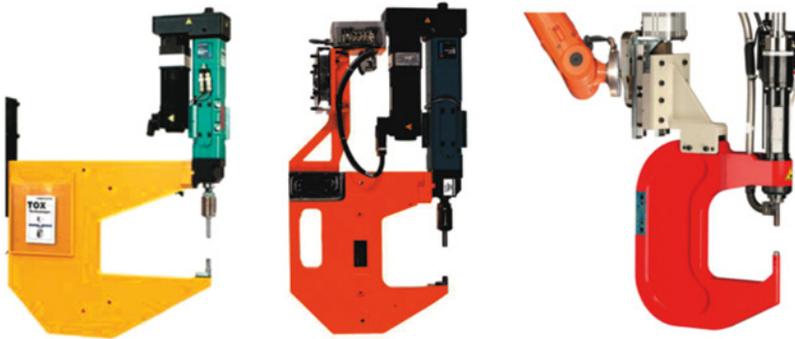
Example designs of frames for industrial robots used for the assembly of motor vehicle bodies
